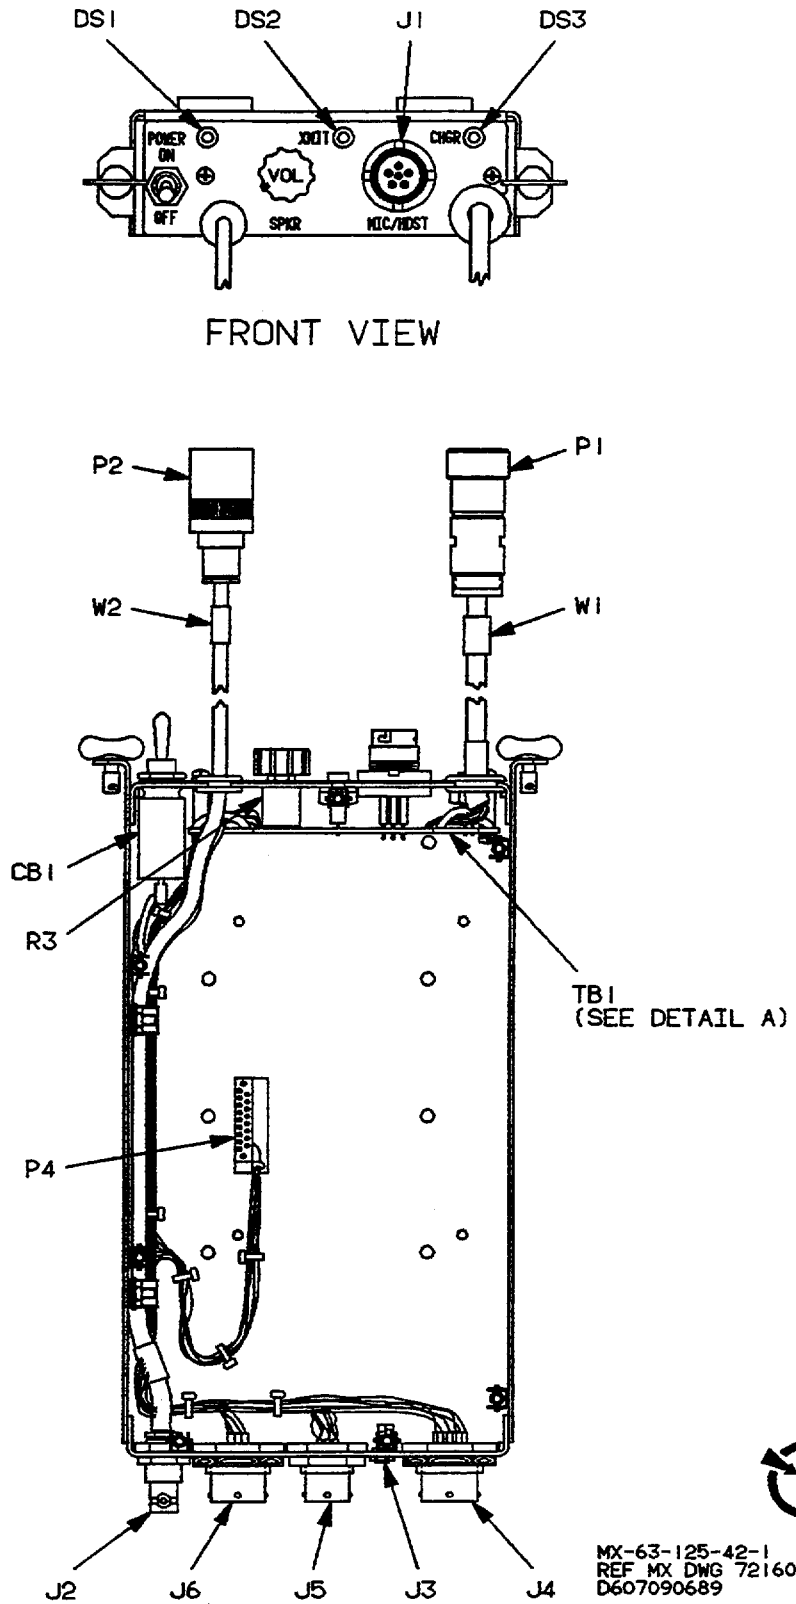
PS/A Chassis Component Location (Sheet 1 of 2)
